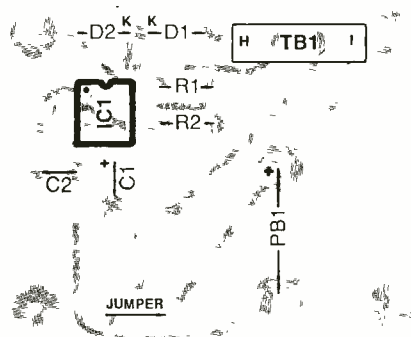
Wiring guide for pc board. Use the layout shown here as a rough guide to component placement if you assemble the circuit on perforated board.
